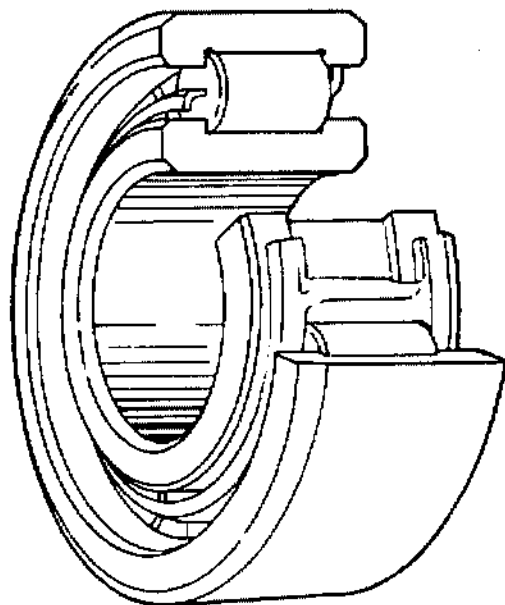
NONLOCATING CYLINDRICAL ROLLER BEARING
